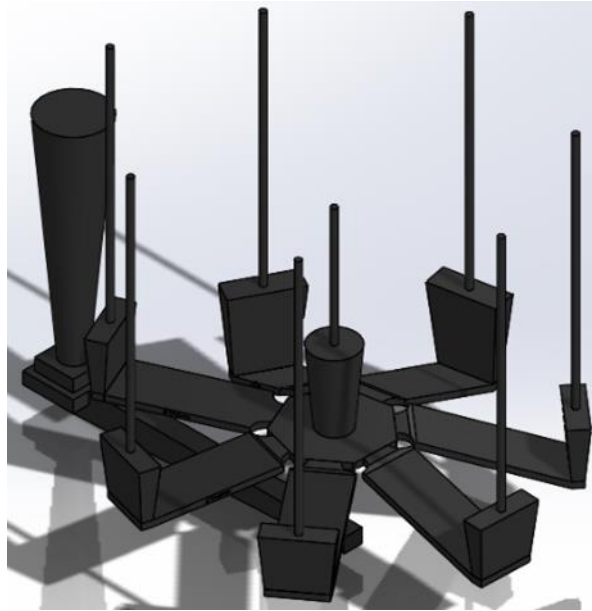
Drawing of Fluorescent Penetrant Inspection Casting in Solidworks
